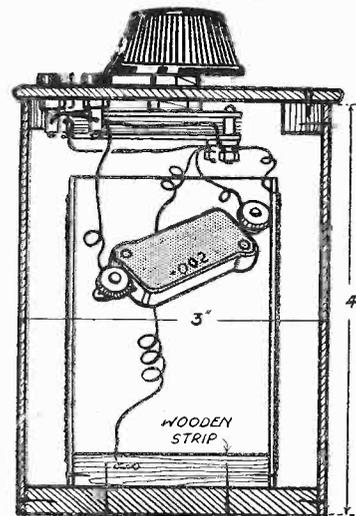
Sectional view of the unit showing how the coil is mounted.
